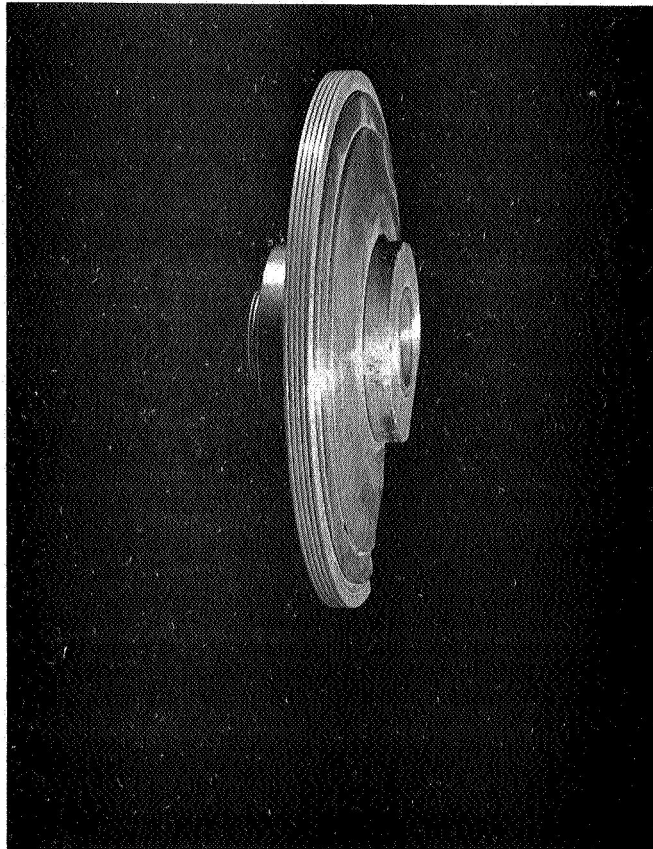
END VIEW OF GANGED GRINDING WHEELS
